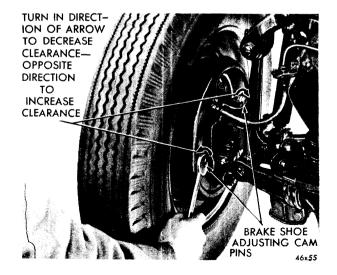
Turning Brake Adjusting Cam (Typical View)
